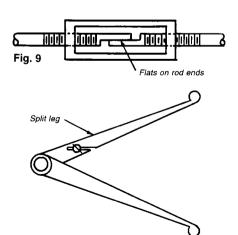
A split-leg caliper is an example of a simple but highly efficient adjusting device. A tapered screw forces the split leg part, thus enlarging the opening between the two legs.
